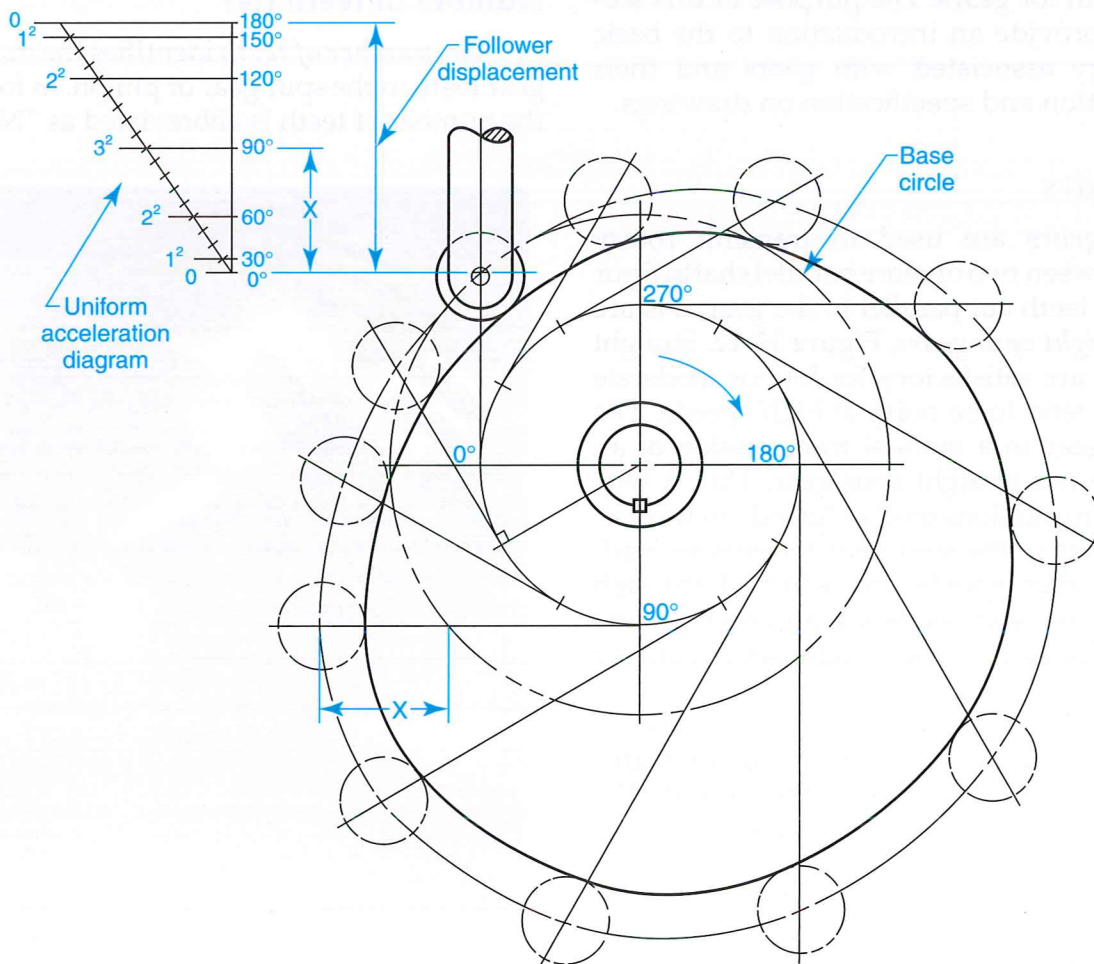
An offset roller follower has a centerline axis “offset” from the centerline axis of the cam. Shown is a cam design with uniformly accelerated motion.
